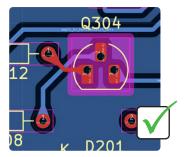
Thermal reliefs. Direct copper connections can cause cold solder joints. Thermal spoke pads ensure solderability.
